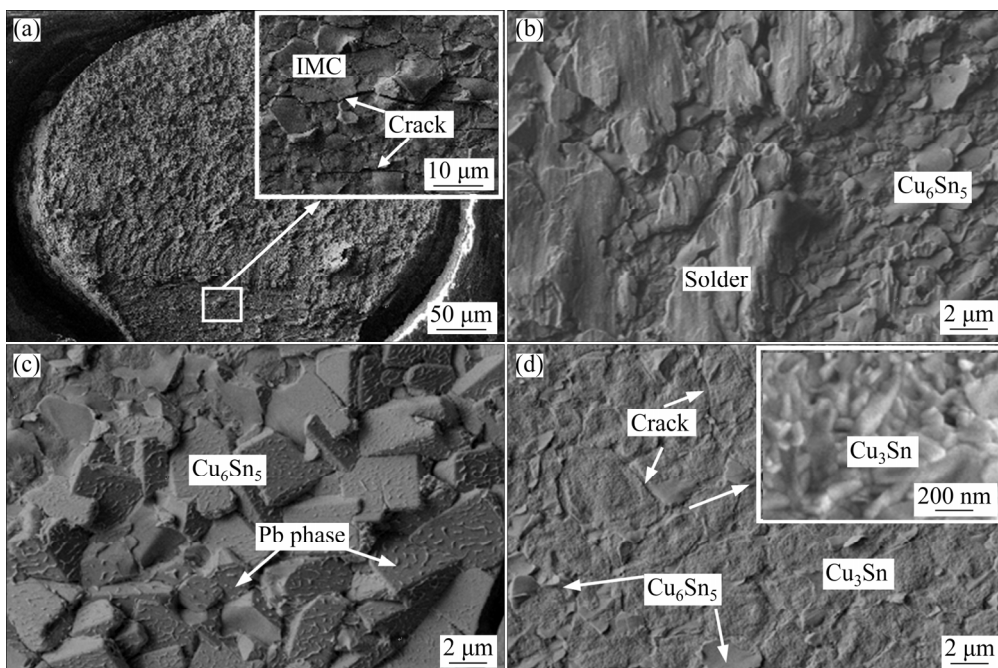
Fracture surface morphology of solder joints with 37 wt.% Pb at different temperatures: (a) 298 K; (b) 223 K; (c) 173 K; (d) 123 K
